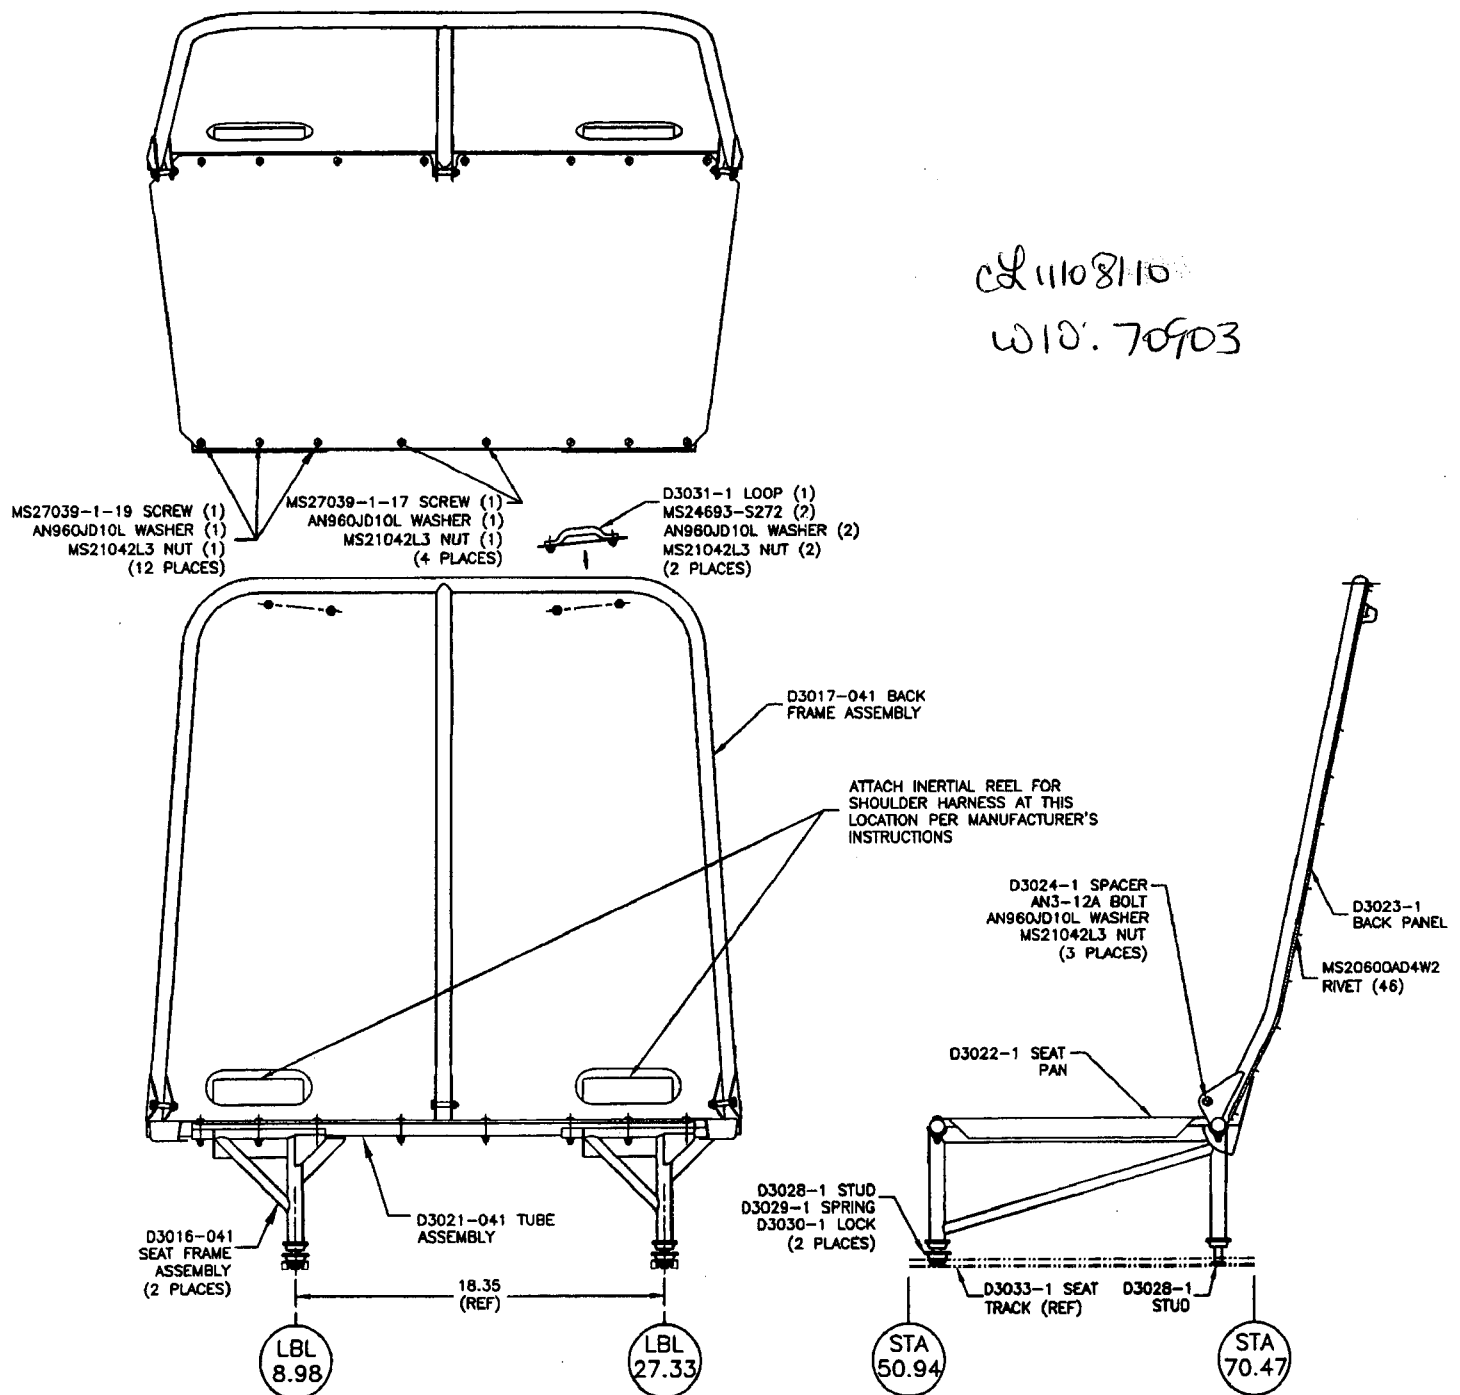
Installation of D350-689-041 Dual High Back Seat Assembly
